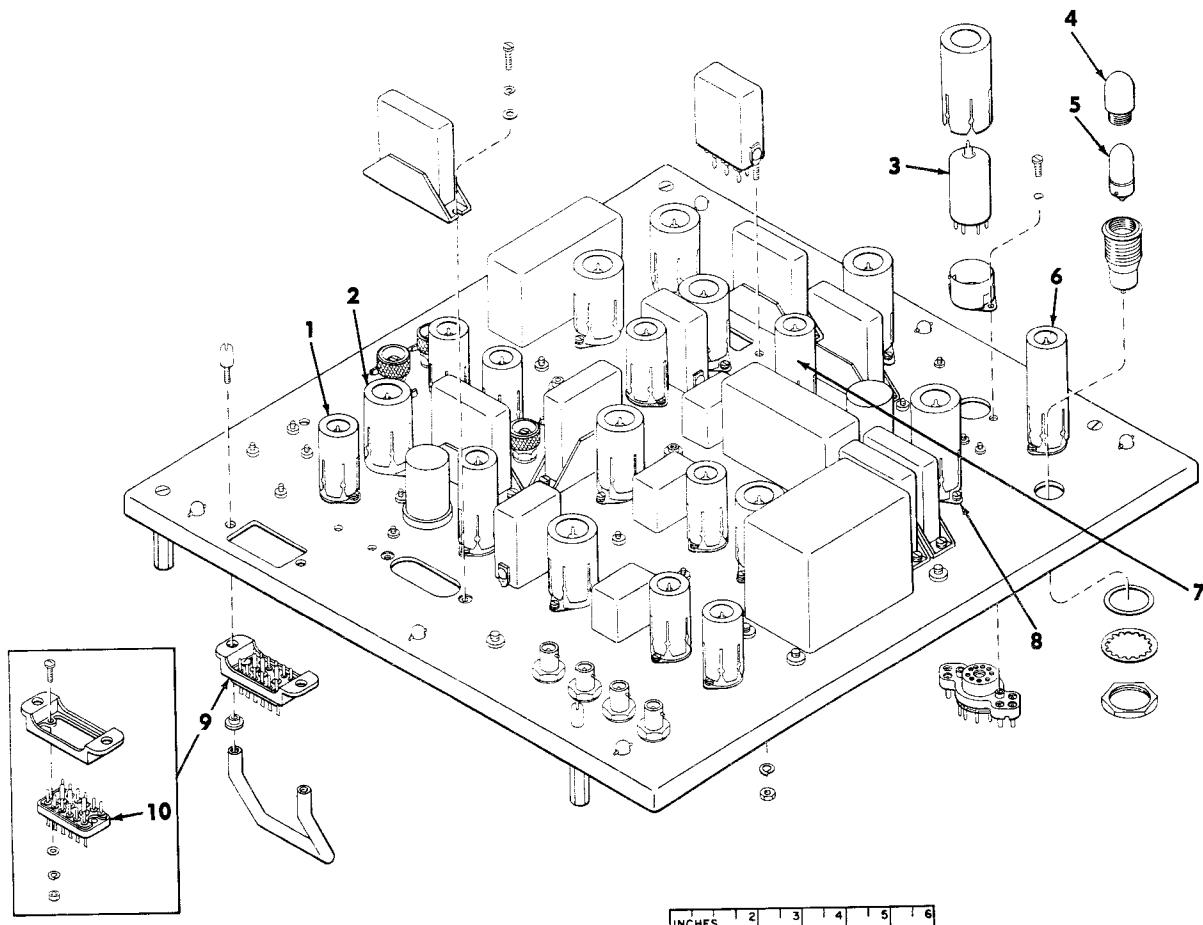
Coder, radar, guided missile (8159347) - partial exploded view
